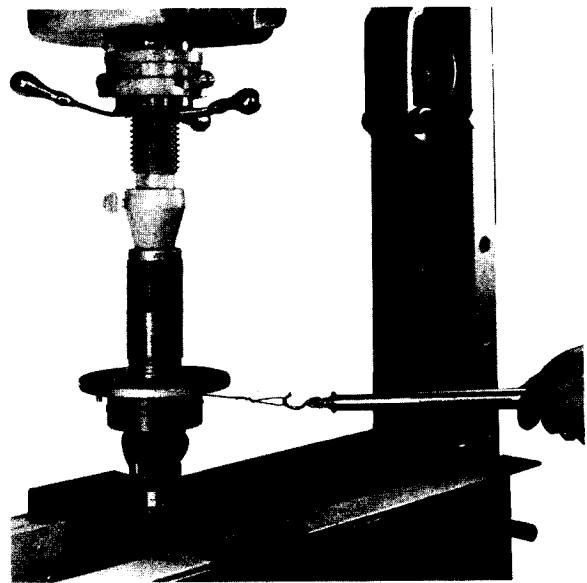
Checking Drive Pinion Bearing Preload with a Spring Scale (pinion in press)
